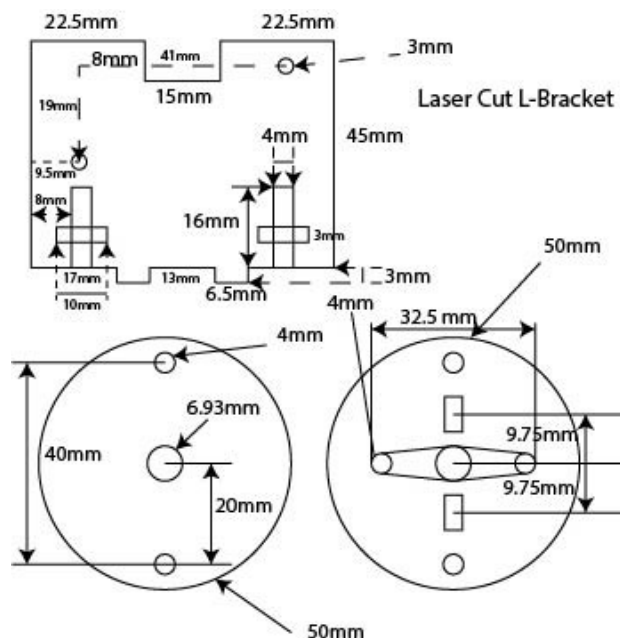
2D designed L-Bracket. Cut using laser cutter.
